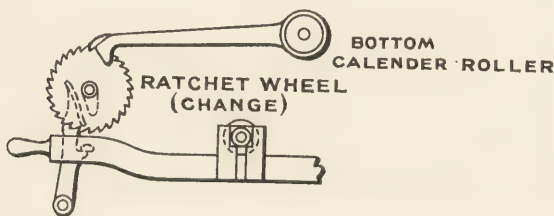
ELEVATION SHOWING BOTTOM CALENDER ROLLER, RATCHET WHEEL, AND DROP LEVER.
